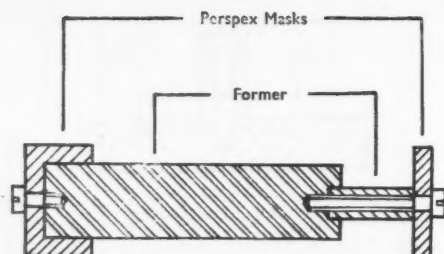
Collapsible former with section masked for chucking to facilitate machining operations prior to extraction
